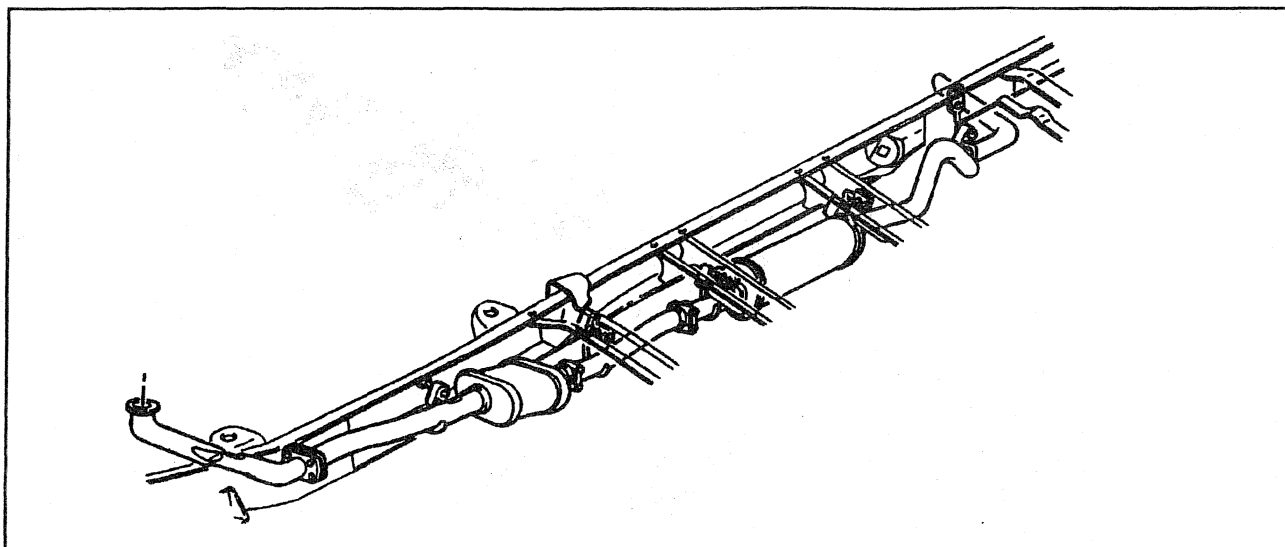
Exhaust System - C/K Cab Chassis (Model 314 w/L65 & 10,000 - 12,000 GVW)
